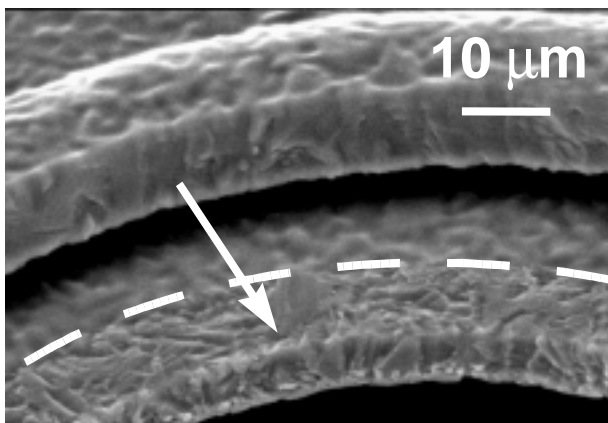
Top and inner surface of gear operated to failure. Arrow and dashed line indicate bearing surfaces.
